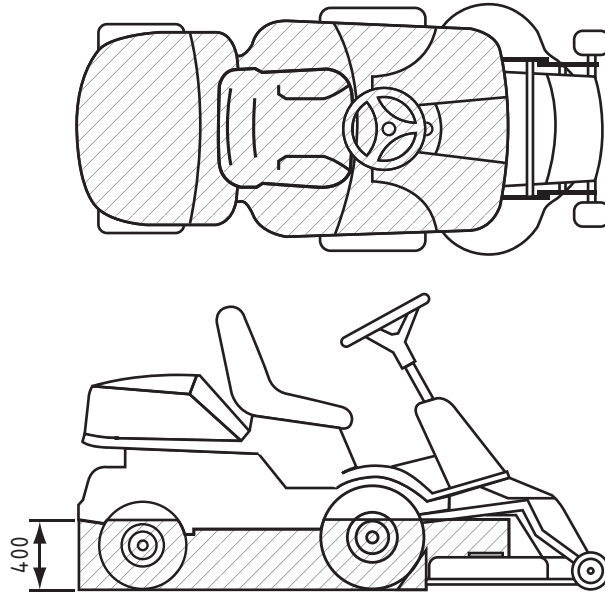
Example of frame envelope for front-mounted cutting attachment and rear steering
